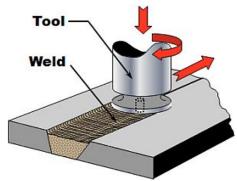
Schematic diagram of the Friction Stir welding Process [3]
